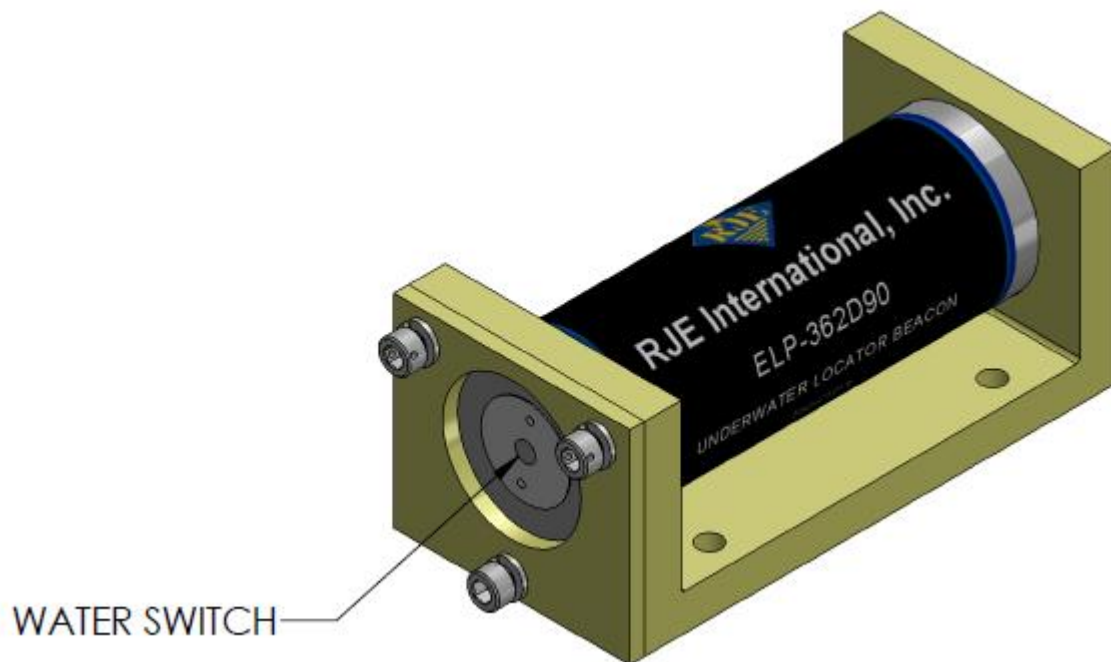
ELP-362D90 Installed in Mounting Bracket
